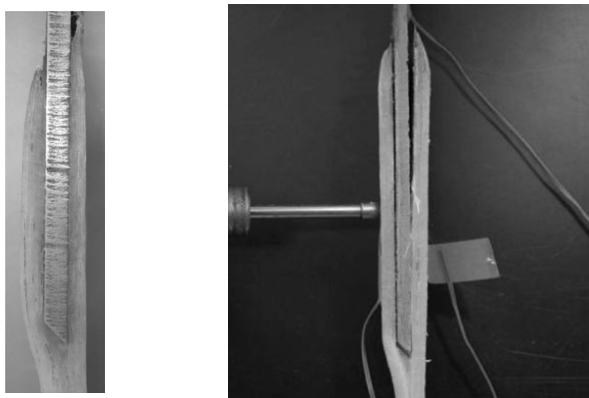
Side view of a 60 mm overlap joint (Left) and a failed specimen (Right).
